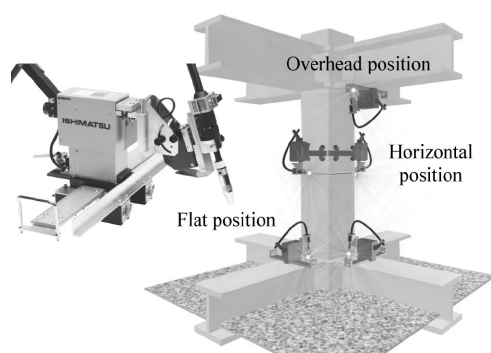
Portable welding robot "ISHIMATSU™" and image of on-site application
